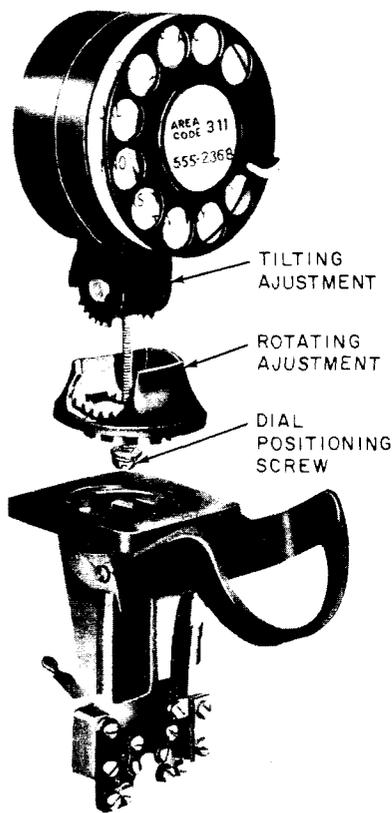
Positioning Adjustments of 43A Dial Mounting
